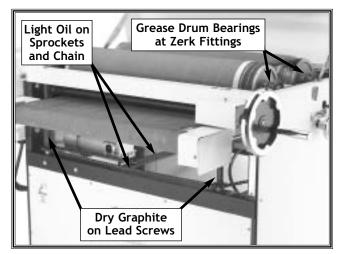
Drum bearings, table head screws, feed conveyor chain and sprockets.
